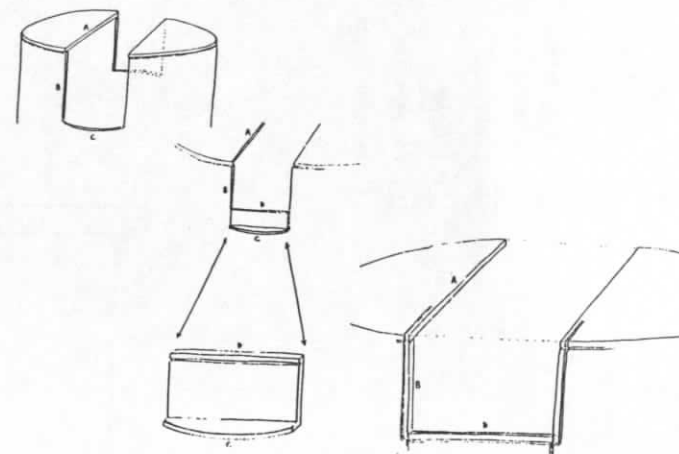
Welding scheme for the bottom section of the plunger vessel.
